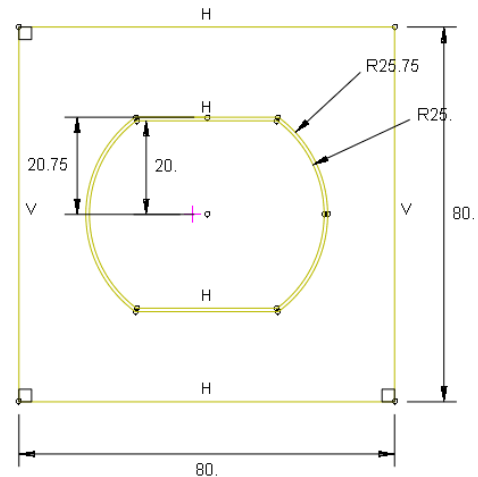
Dimensions of the gap and external detail plate implemented in Abaqus, the internal detail plate has a circular shaped hole.
